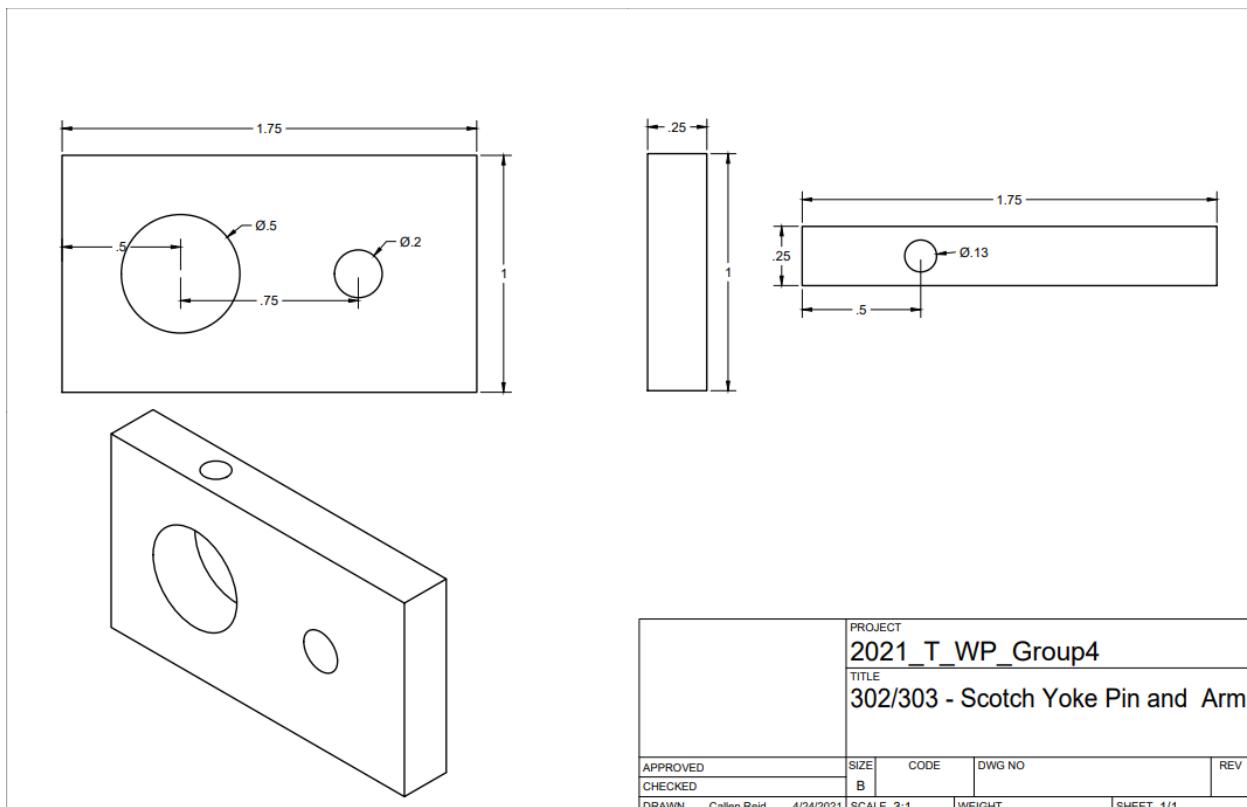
Scotch-Yoke Pin and Arm Drawing
